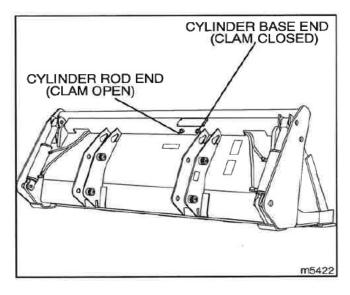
Multi-Purpose Bucket Hydraulic Connections
